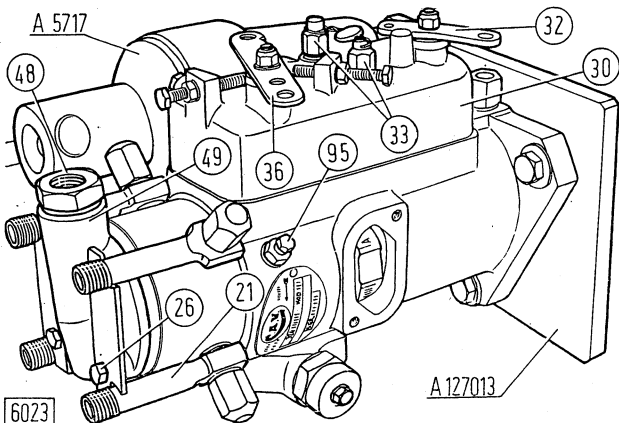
Pump mounted on dismantling and assembly fixture A 5717 with plate A 127013.
